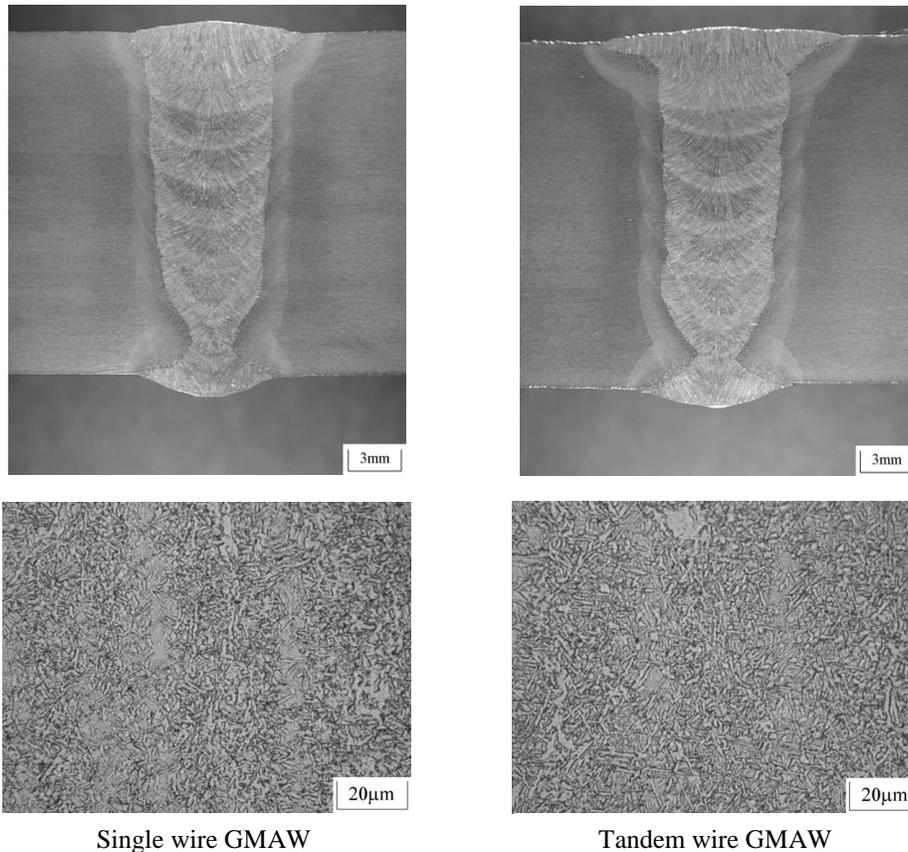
Process Variant Weld Macro Sections and cap weld microstructures
